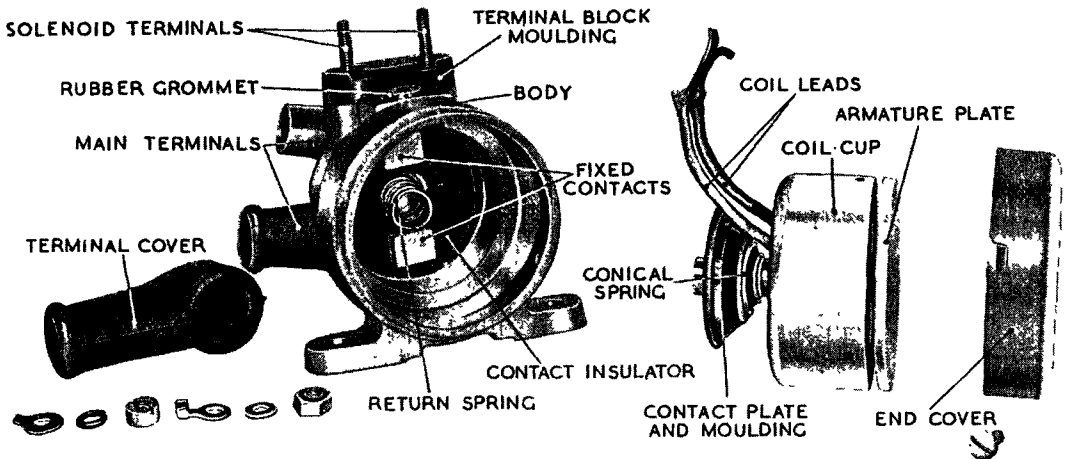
Rotax solenoid switch, type D.0213, partly dismantled
